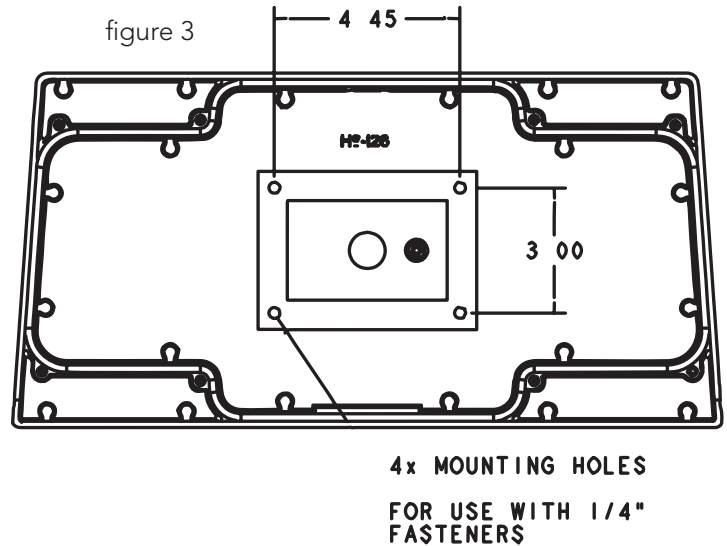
dimension PBBW mounting holes (GR-2479).
